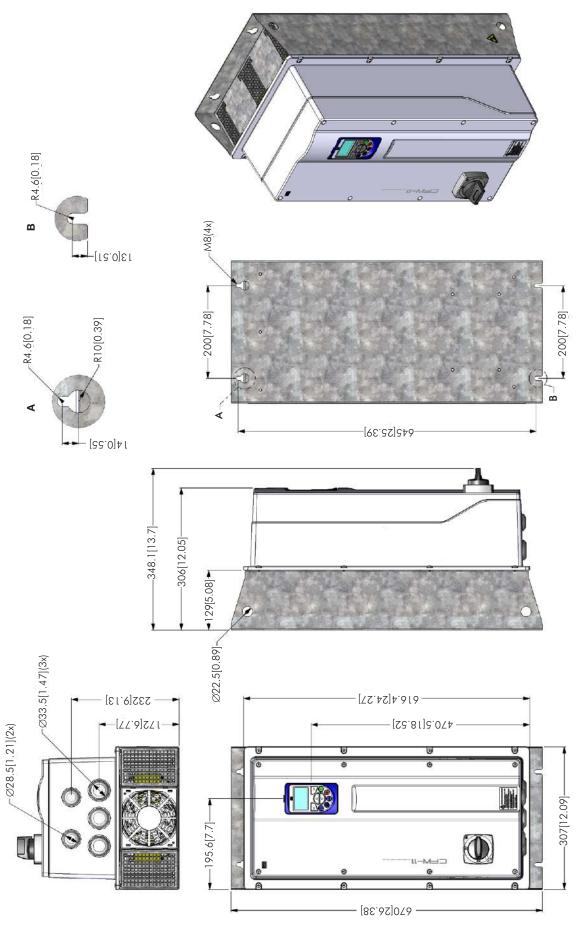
Inverter dimensions - frame size B - mm [in]
